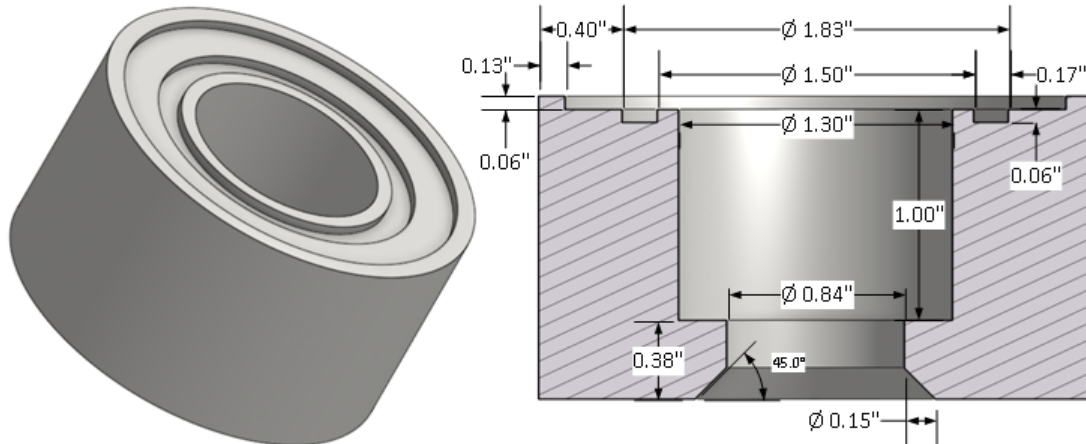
Schematic of a small plate with a cross-sectional view indicating its dimensions in inches.
